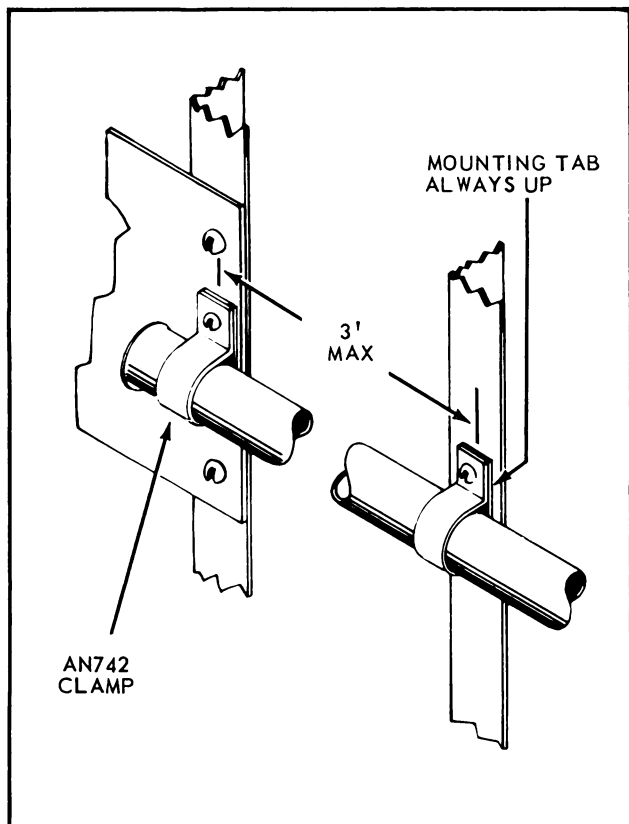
Spacing Clamps for Rigid Metallic Conduit
